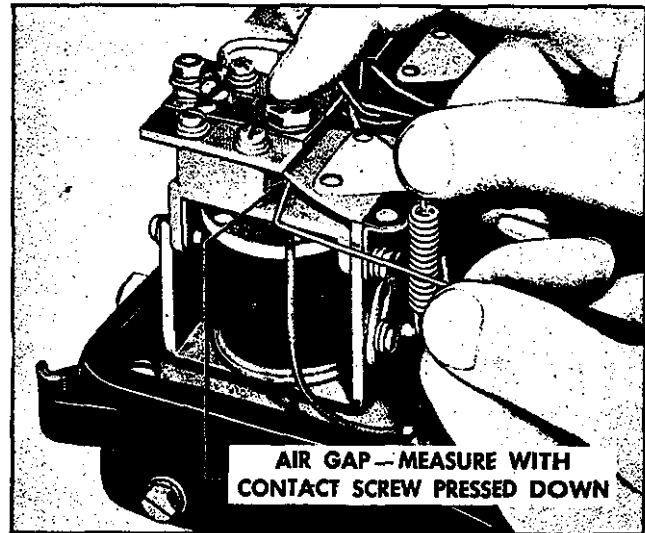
Checking Air Gap on Voltage Regulator with wire Gauge
